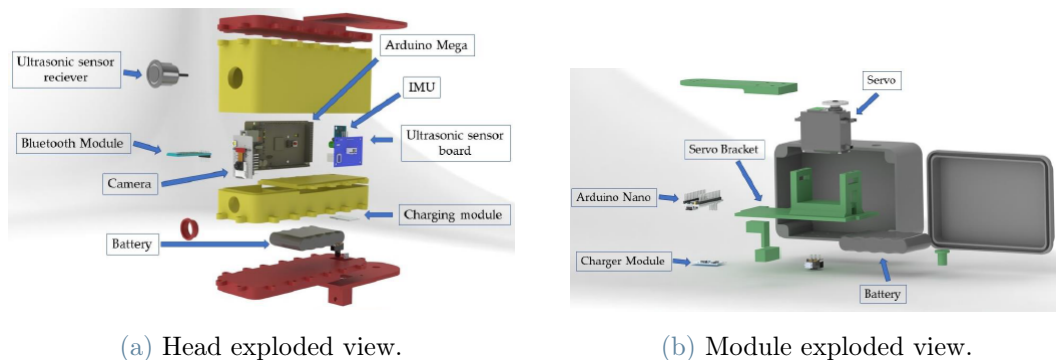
CAD exploded views of the head and module of the first version of the robot.
